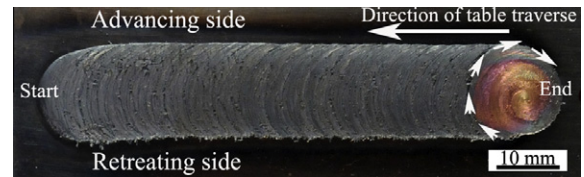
Photograph of a typical friction surfaced tool steel coating.
